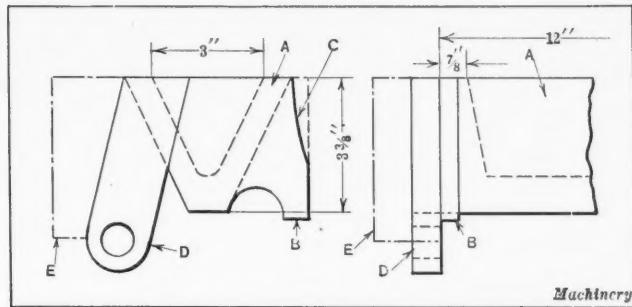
Pouring Basin Pattern, showing how Improvements in Design simplify Molding
